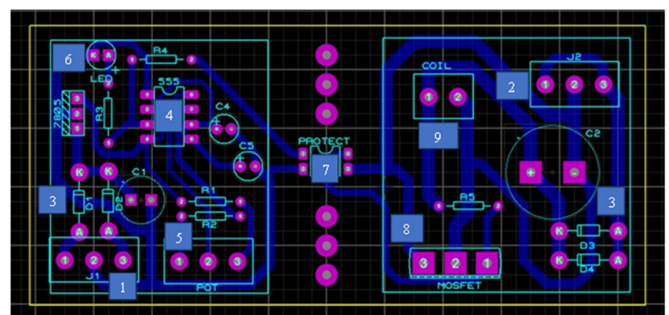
Solid-state cascaded PCB design: Dimension 5x6 cm; (1) and (2) mains input; (3) rectifier diode; (4) NE555 IC; (5) potentiometer; (6) indicator LED; (7) optocoupler jumper; (8) MOSFET; (9) ignition coil.
